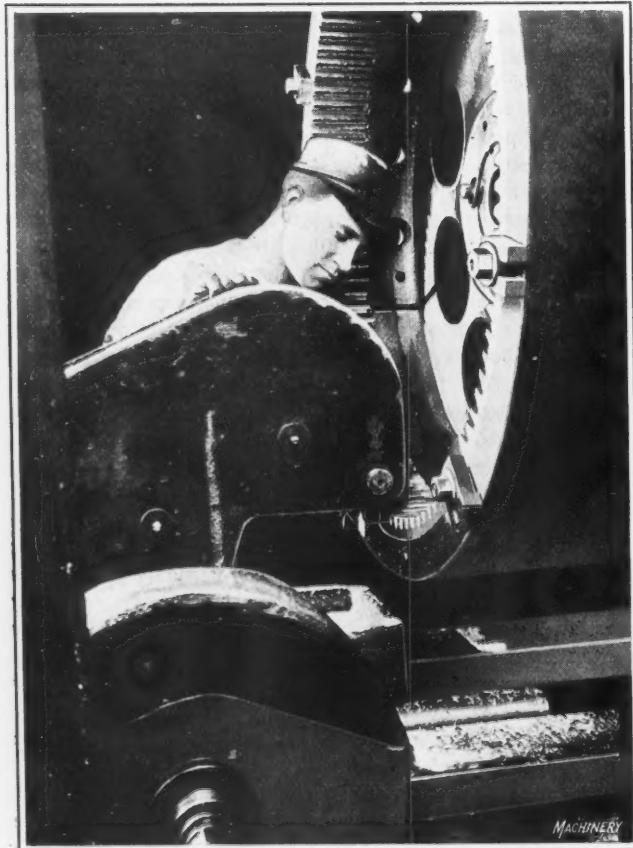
Detail View of an Internal Gear-cutting Attachment at Work
